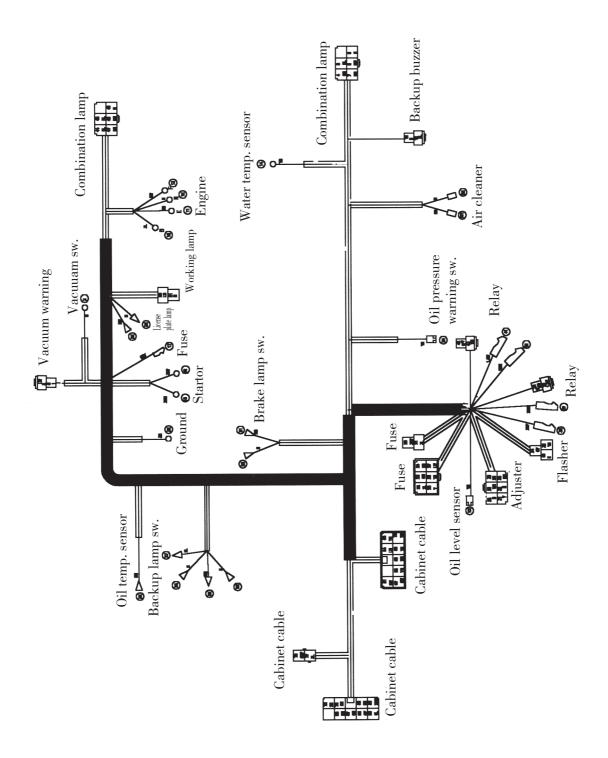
Engine wire harness. CPCD80-100-C -38-
